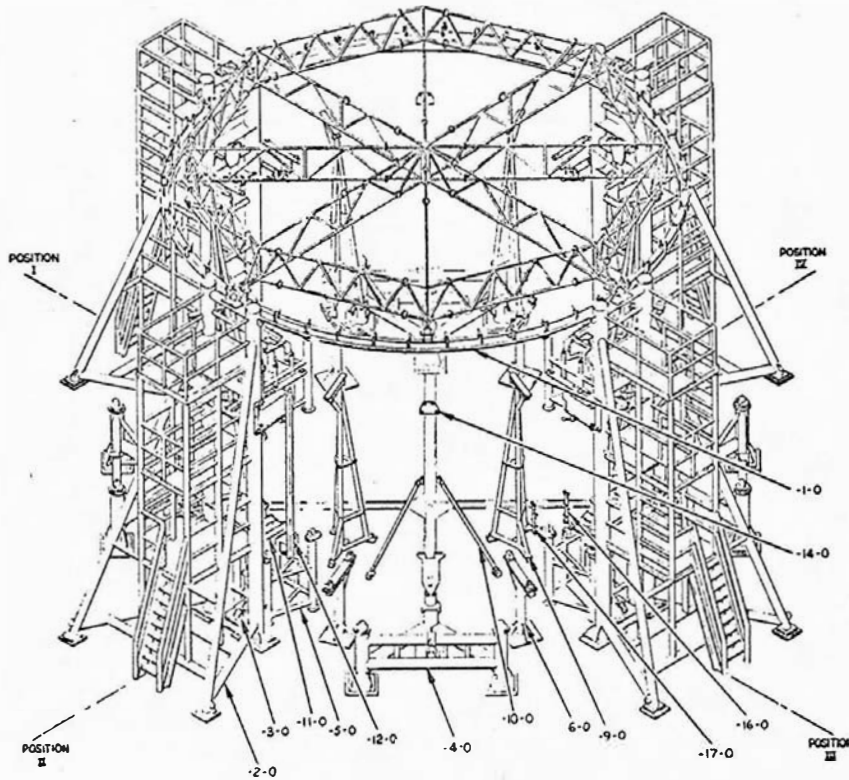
Inboard Propellant Duct Support Assembly 60B19765
